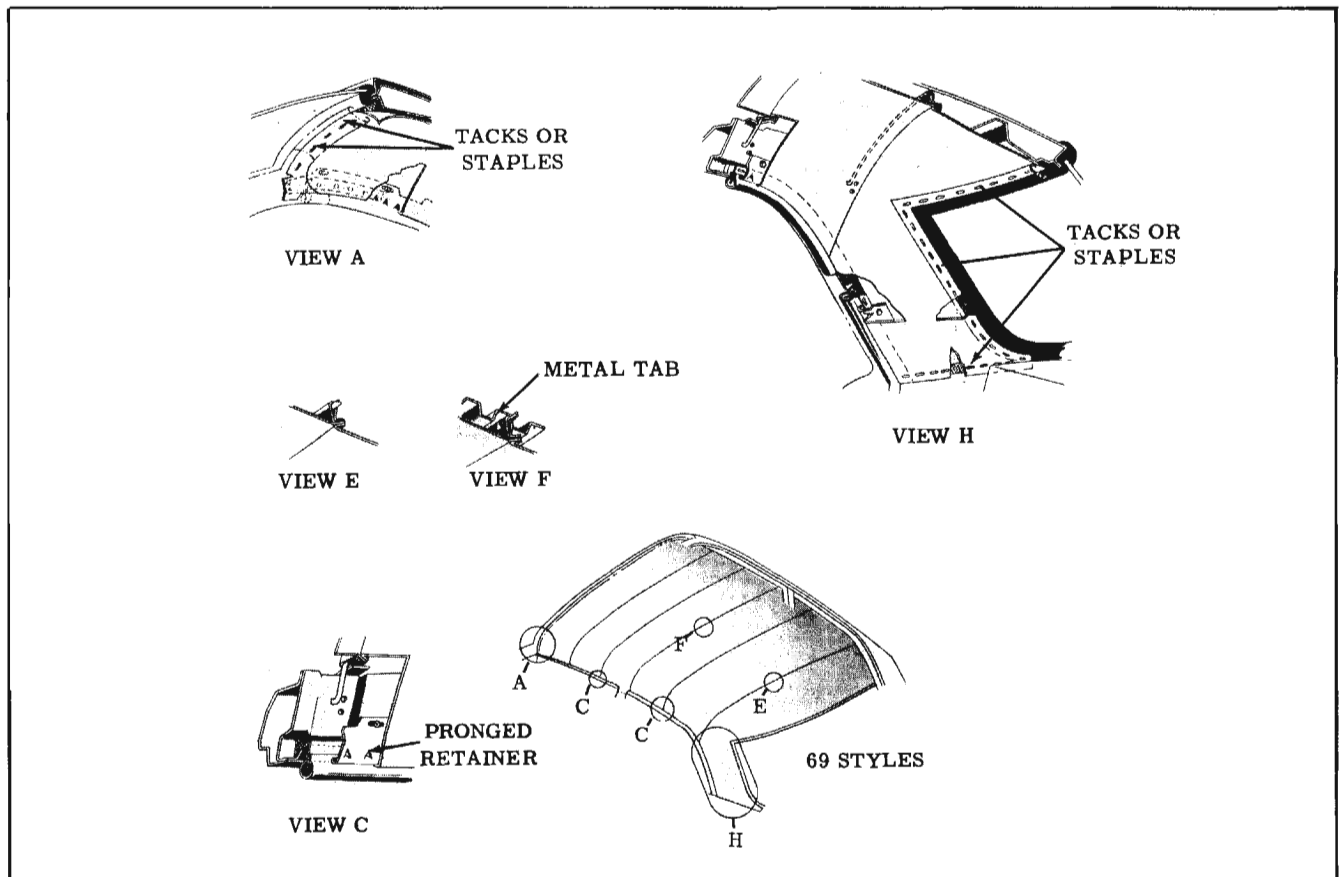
Headlining Installation (3269 and 3569 Styles)
